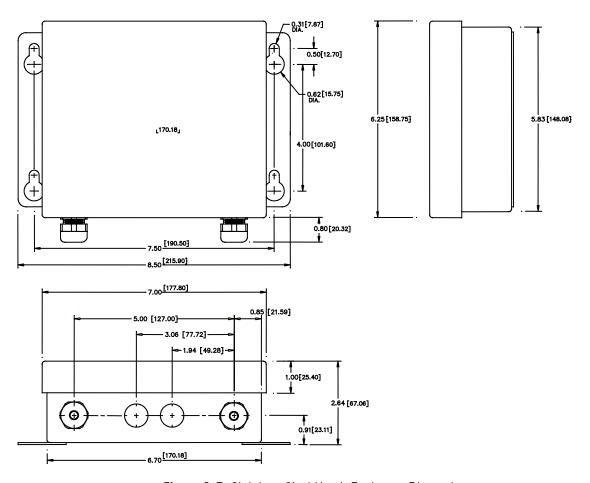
Stainless-Steel Harsh Enclosure Dimensions
